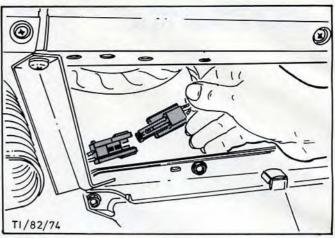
Disconnect blower motor plug (bezel of heater control unit removed for clarity).
